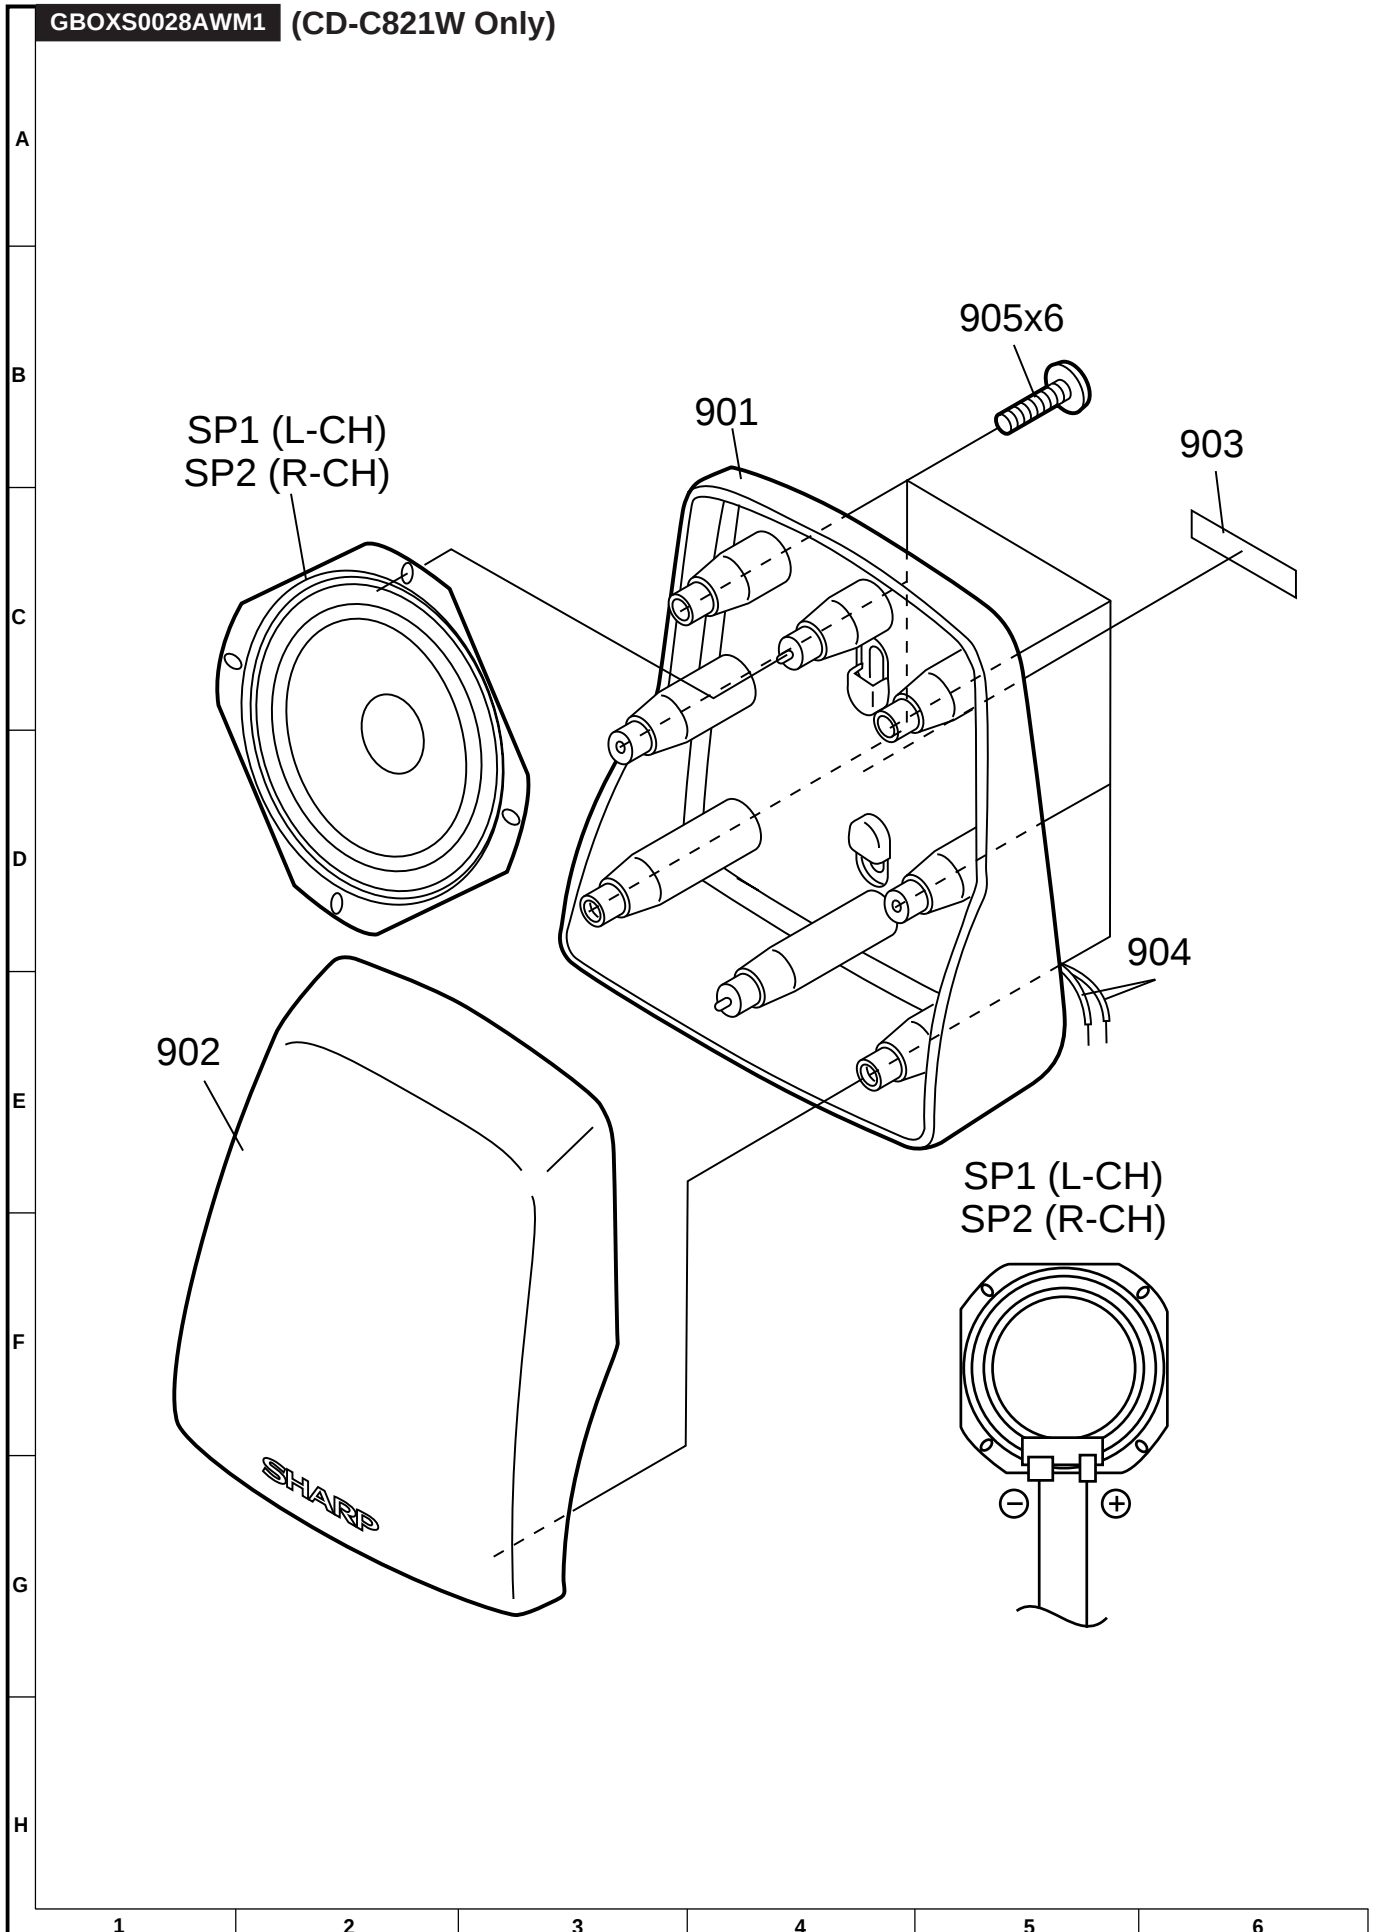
SPEAKER EXPLODED VIEW (3/3)
